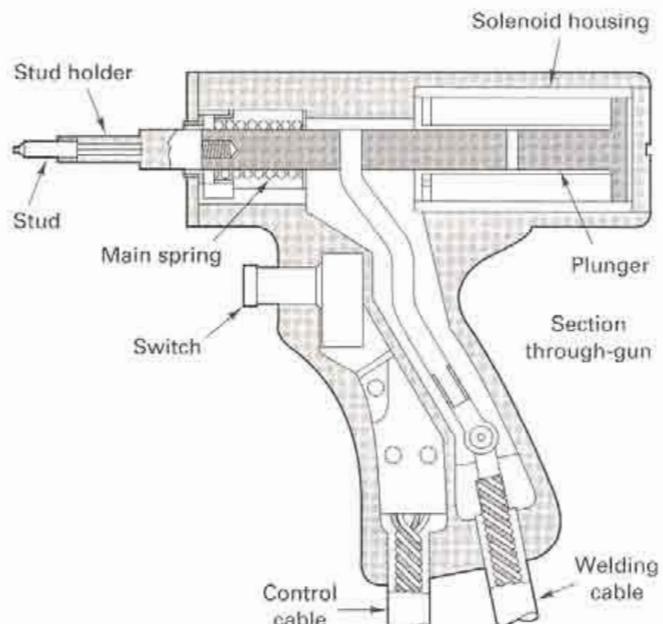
Diagram of a stud welding gun. (Courtesy of American Machinist.)
